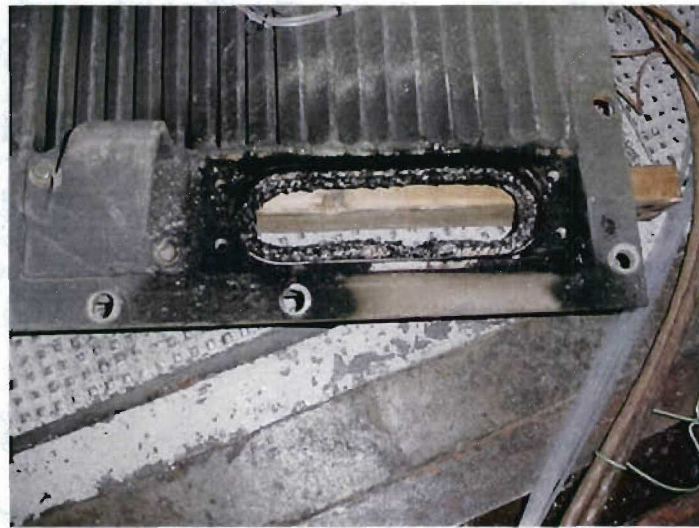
Exhaust Grille with Inset Exhaust Gas Seal
